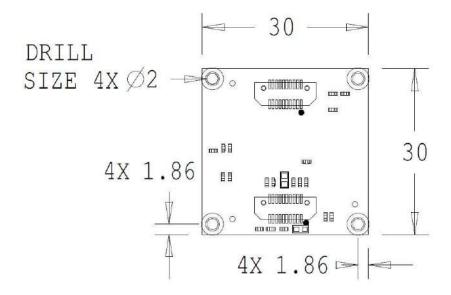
e-CAM50_CUiMX8 Camera Adaptor Board Mechanical Dimensions
